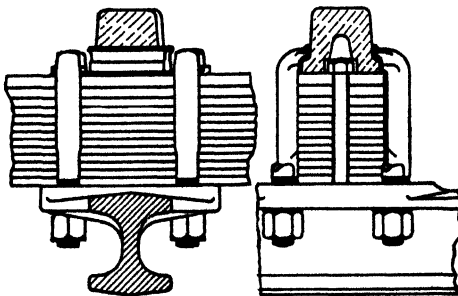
SPRING MOUNTING WITH BOX CLIPS.
